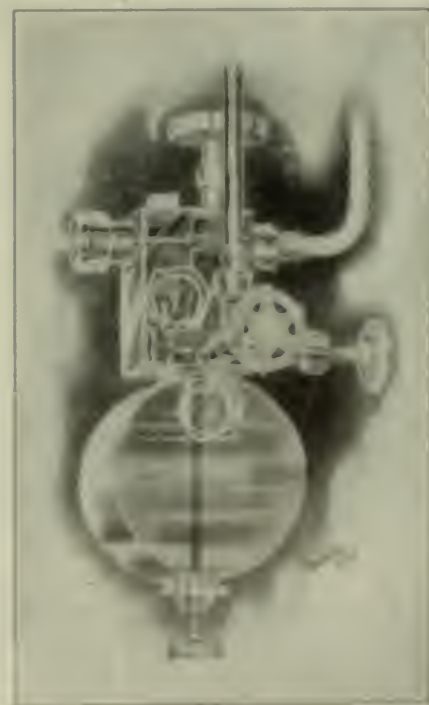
GREASE OIL FEEDER LUBRICATOR
